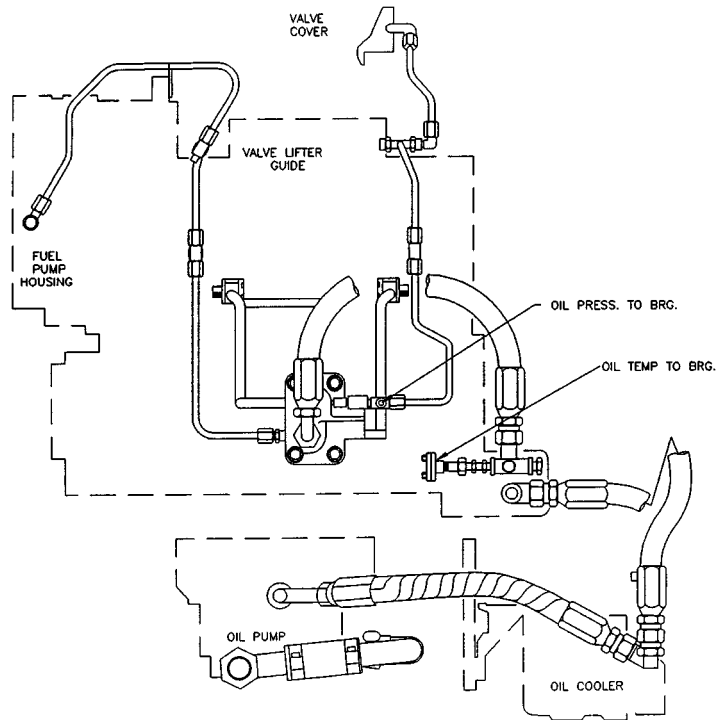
1Y580 Engine Oil Lines Group - Part 1
